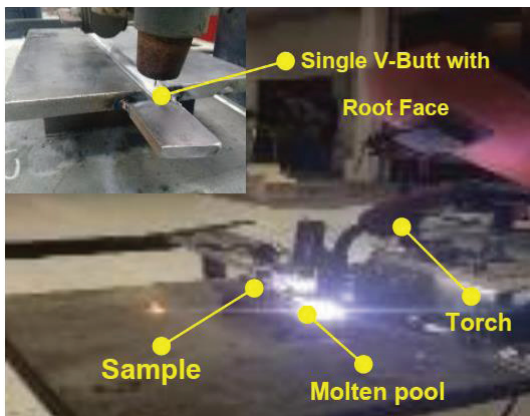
shows steps of AISI 1050 with the metal active gas welding process
